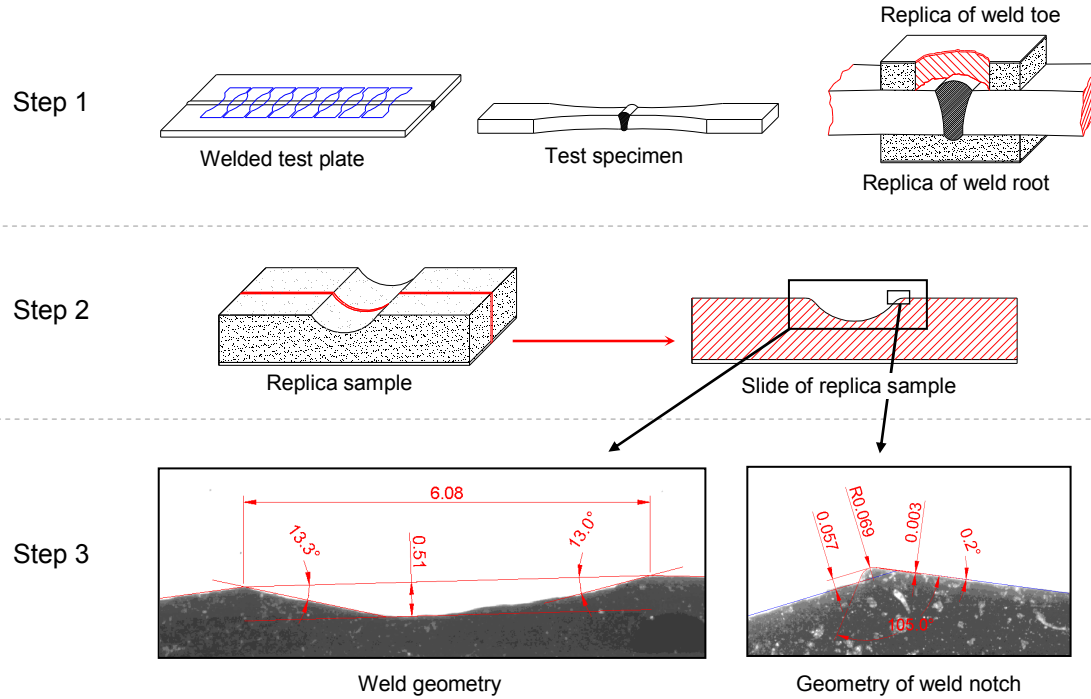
Procedure to measure the weld geometry: Step 1) preparing the replica of weld, Step 2) producing the slides of replica sample, Step 3) macroscopic analysis of the replica.
